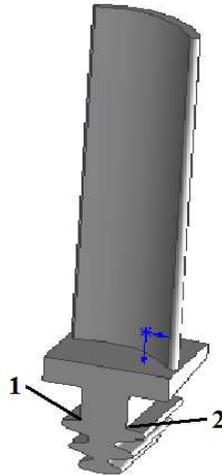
A multi-trapezoidal-type blade root.1) is typically found cracks, 2) recorded only traces of corrosion
